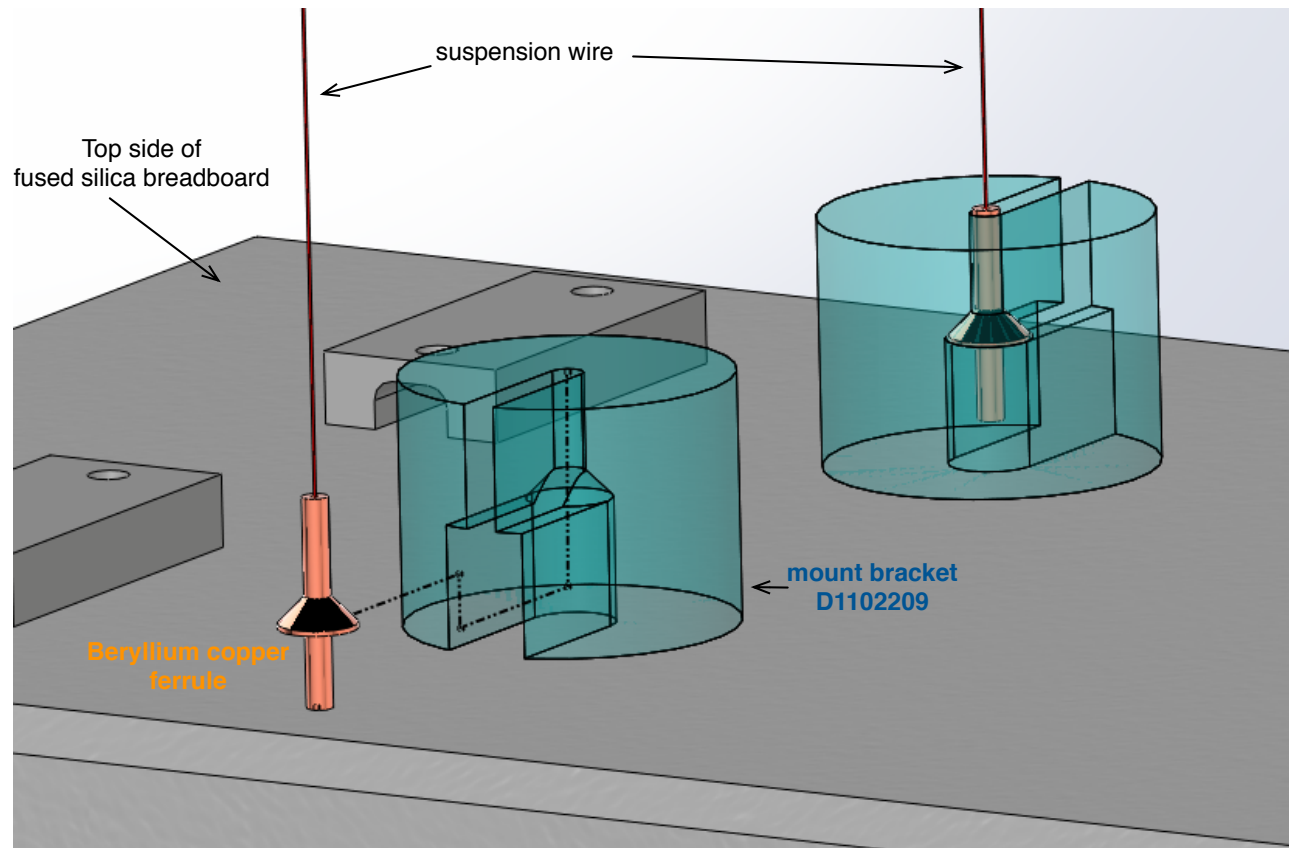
Design for attachment of the suspension wires to the OMC breadboard. A cone-shaped beryllium copper ferrule is affixed to the end of each suspension wire (crimp attachment). This ferrule slips into a slot in the fused silica mount bracket (D1102209), and the conical shape of the ferrule keys into a conical counter-bore in the bracket. There are two such mounting points at each end of the breadboard (other end not shown), four overall. The mount bracket is bonded to the breadboard with UV-cure epoxy. (The u-channel gray blocks in the background are mounts used for balance masses.)
